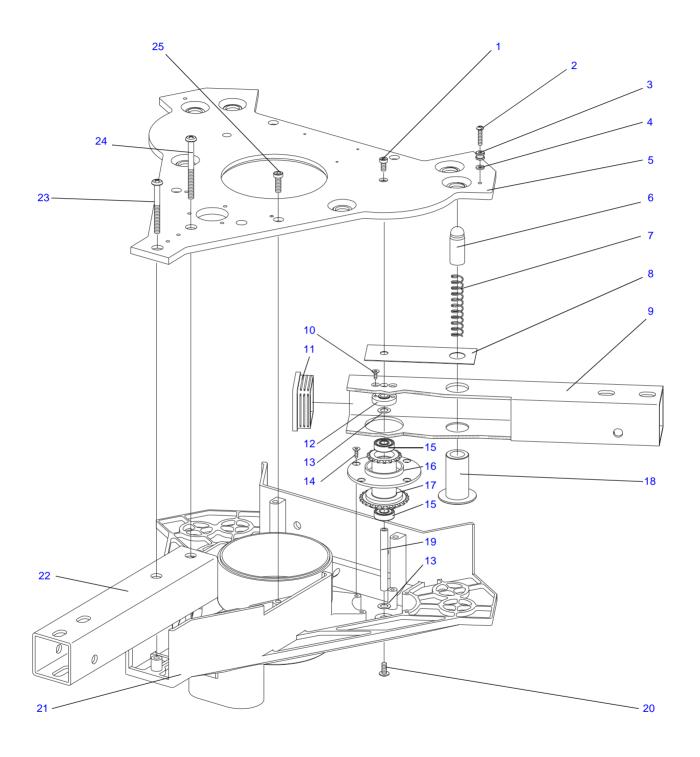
Osprey Plus Single-Stage Pedestal - Skid - Crab/Steer Changeover Mechanism (Cont)
